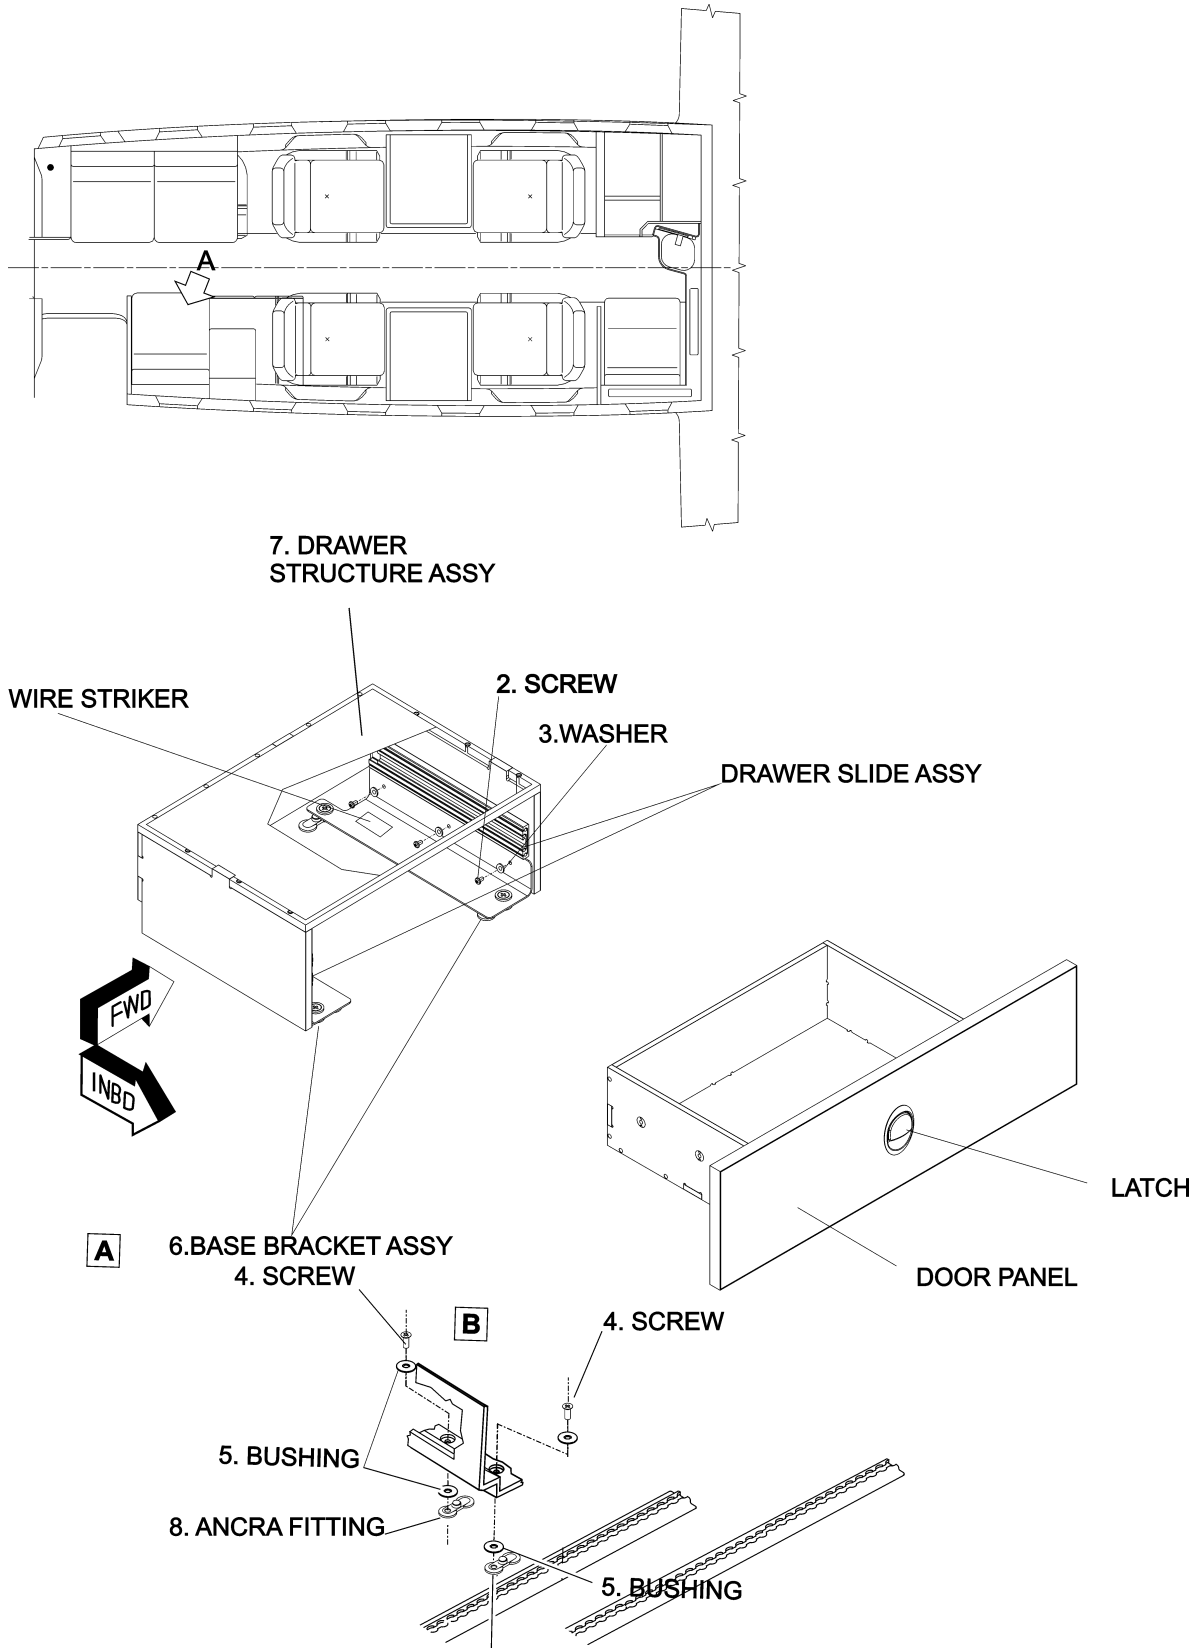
Right Hand Divan Drawers - Removal/Installation
